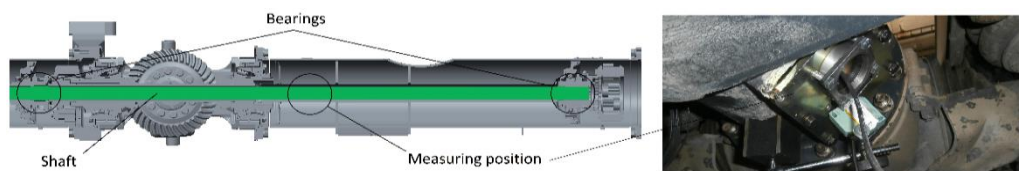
3D model of the drive shaft and the measuring position on the right.
